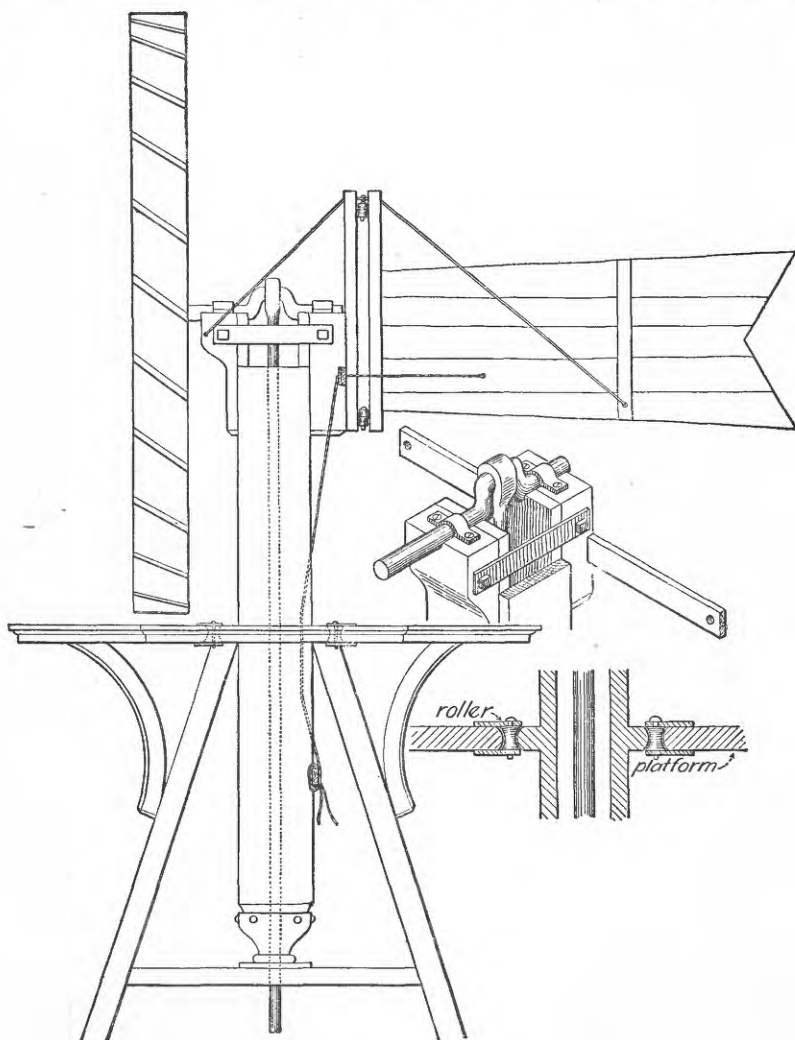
Side view and details of revolving parts of homemade turbine windmill of W. F. McComb, Grand Island, Nebraska.
